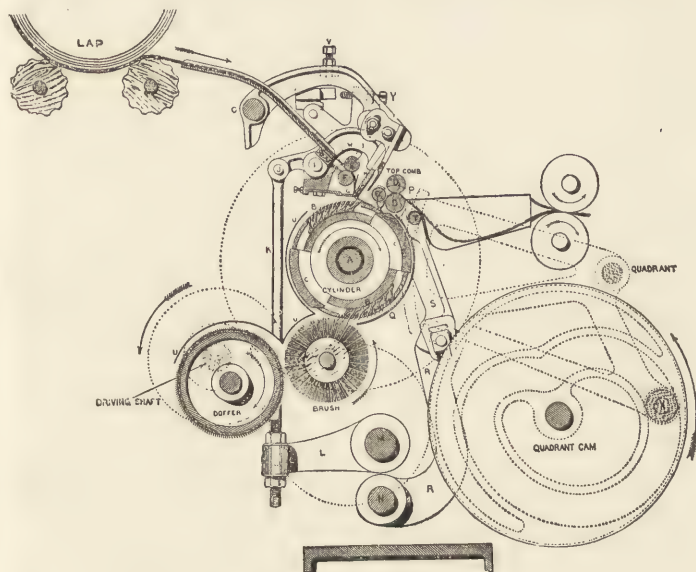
SECTION OF 'DUPLEX' COMBING MACHINE.
